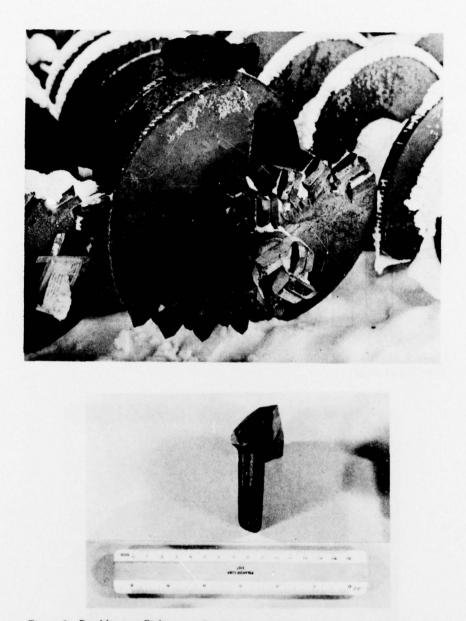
Double-start flight-auger for Hughes, with 10 tungsten carbide insert cutters (heavy-duty rock blade Gopher teeth). Pilot uses some cutters. Made by H and T Auger Co., Inc.
